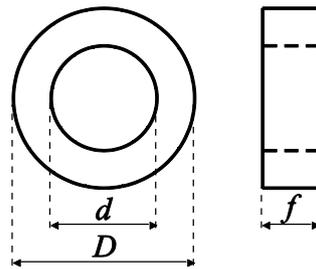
Toroid core and its geometrical dimensions. Note that the winding is not included.
